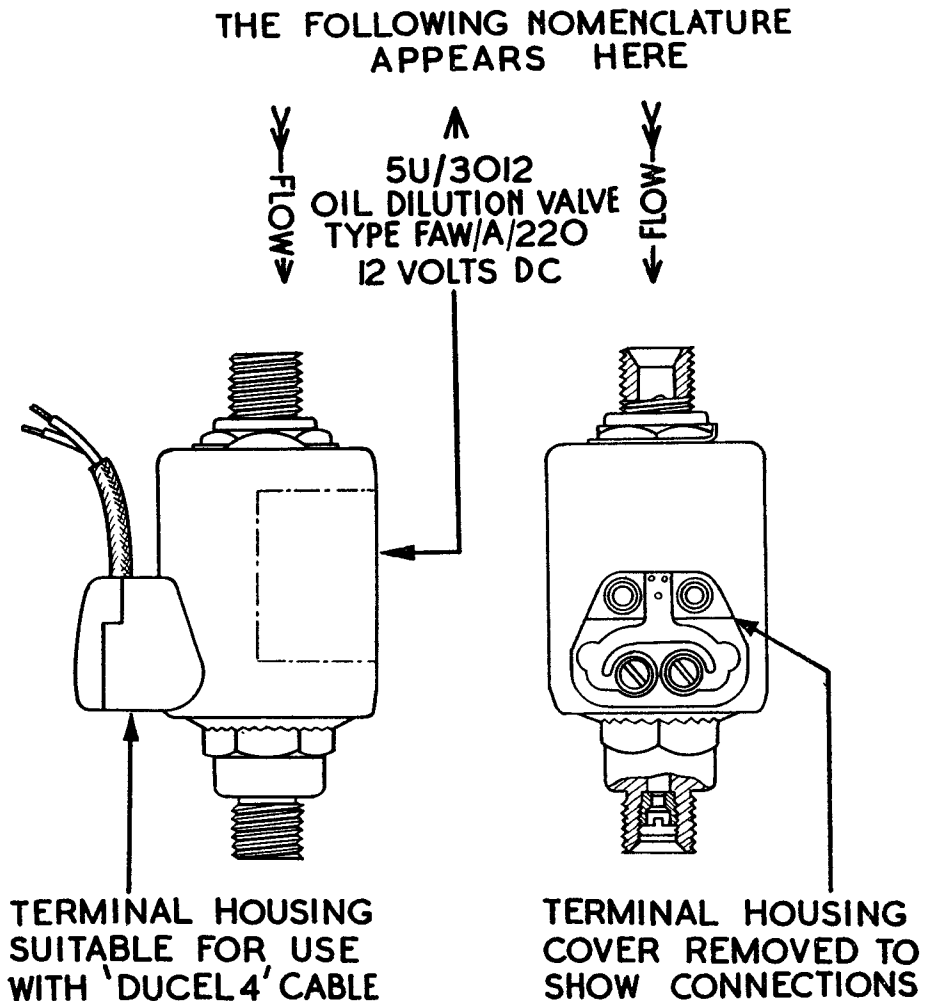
Later model solenoid valve, type D, showing terminal block
